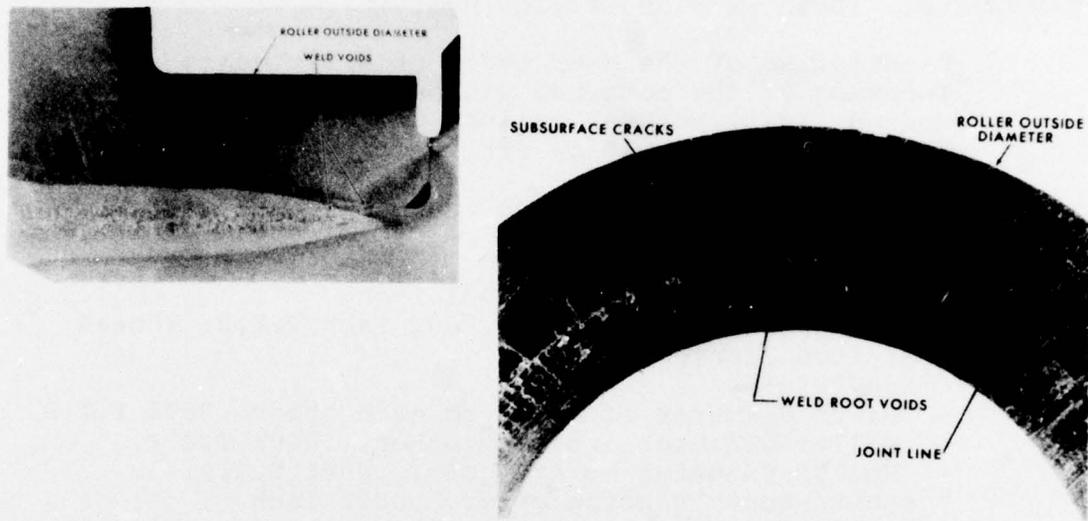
Weld Porosity, First-Row Pinion.
